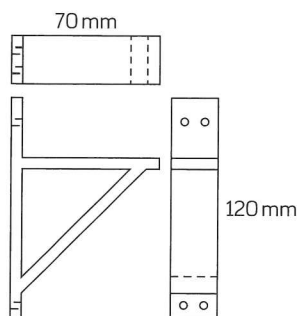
Orthographic drawing of a redesigned shelf bracket
